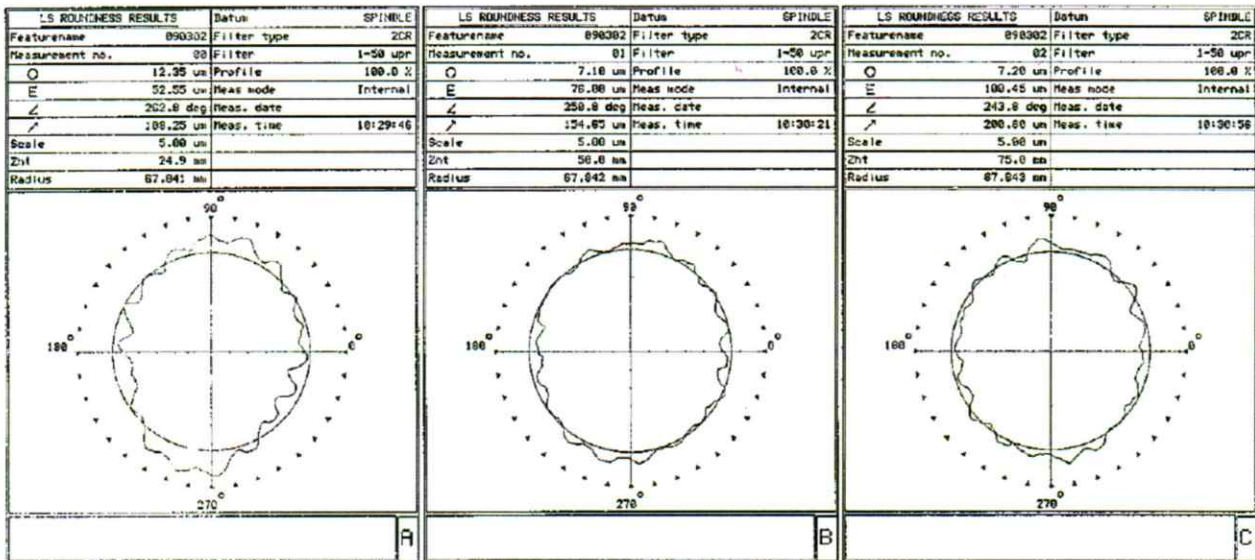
Measurement result of machining roundness of the workpiece
